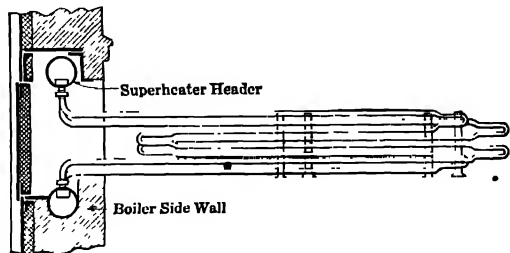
Assembly of Elesco Superheater — Side Elevation.
